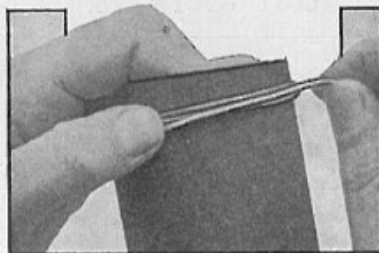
Showing position of the third turn of the wire in double-bank winding.
